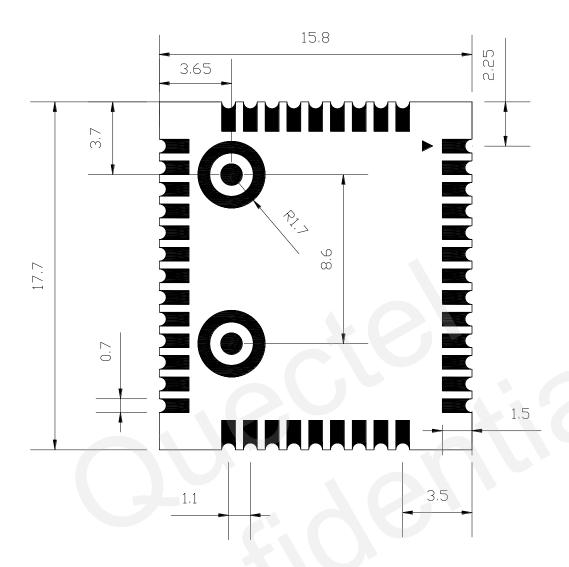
M66 Module Bottom Dimensions (Unit: mm)
